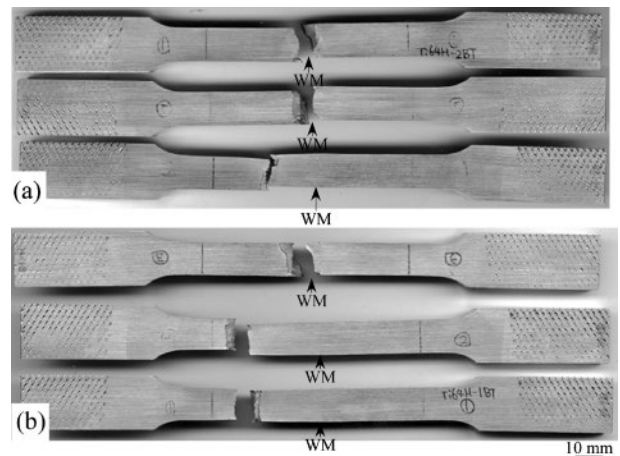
Photographs of tested specimens of welded joints of 12 mm thick Ti-6Al-4V titanium alloy by hybrid welding with different laser powers: (a) 8 kW-10 kW, (b) 10 kW-10 kW.
